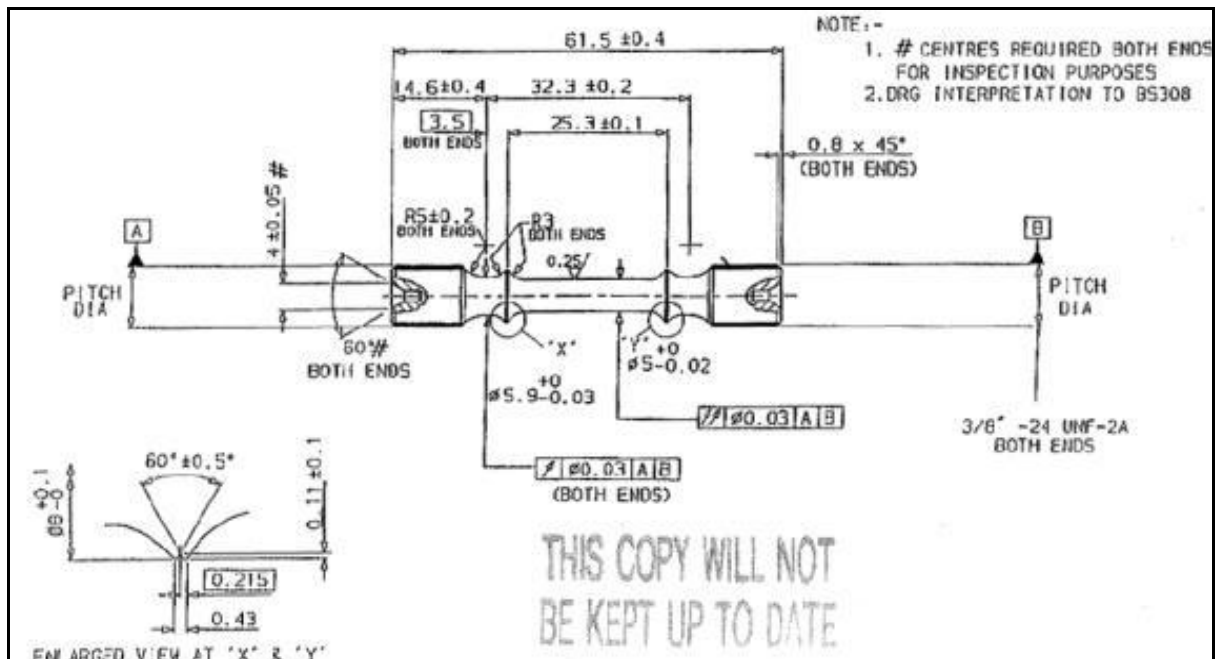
RLH10004 Tensile test-piece geometry [153]
